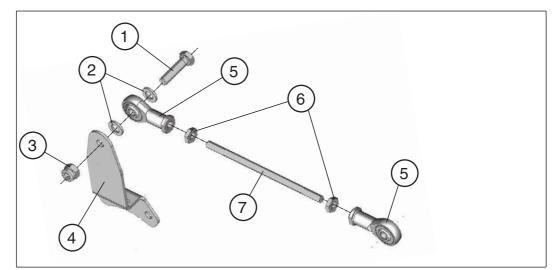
Assembly of the extension arm and mounting on the support plate
